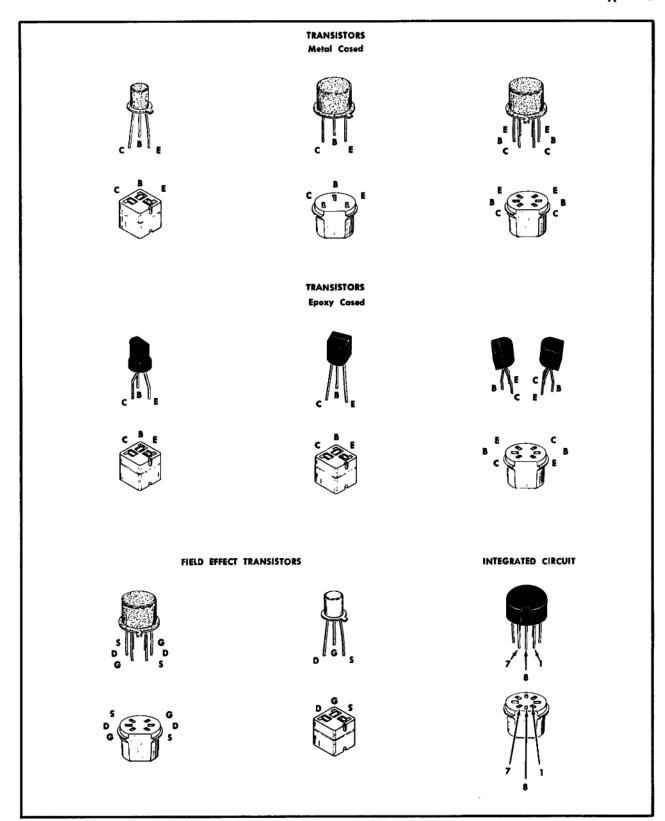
Lead configuration for socket-mounted transistors and integrated circuits, top view.
